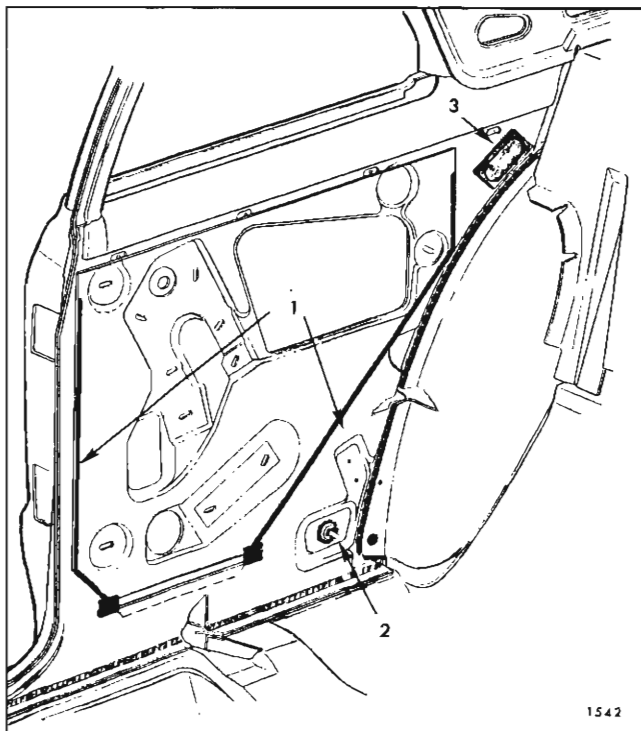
E10—Rear Quarter Inner Panel Sealing - "11" Style
